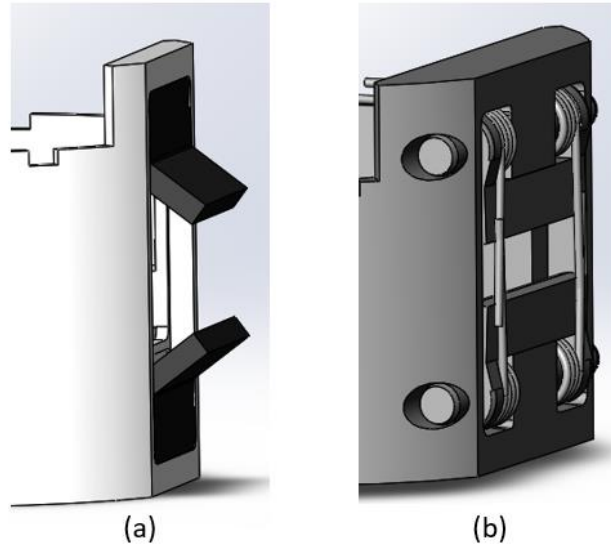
Two configurations for the exit doors considered during the design of the device. (a) flexible exit doors, shown in its extended position. (b) rigid exit doors with torsion springs, fixture to the housing with dowel pins.
